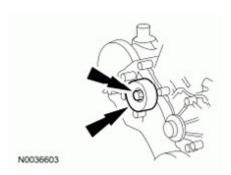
Installing Coolant Pump Courtesy of FORD MOTOR CO.
